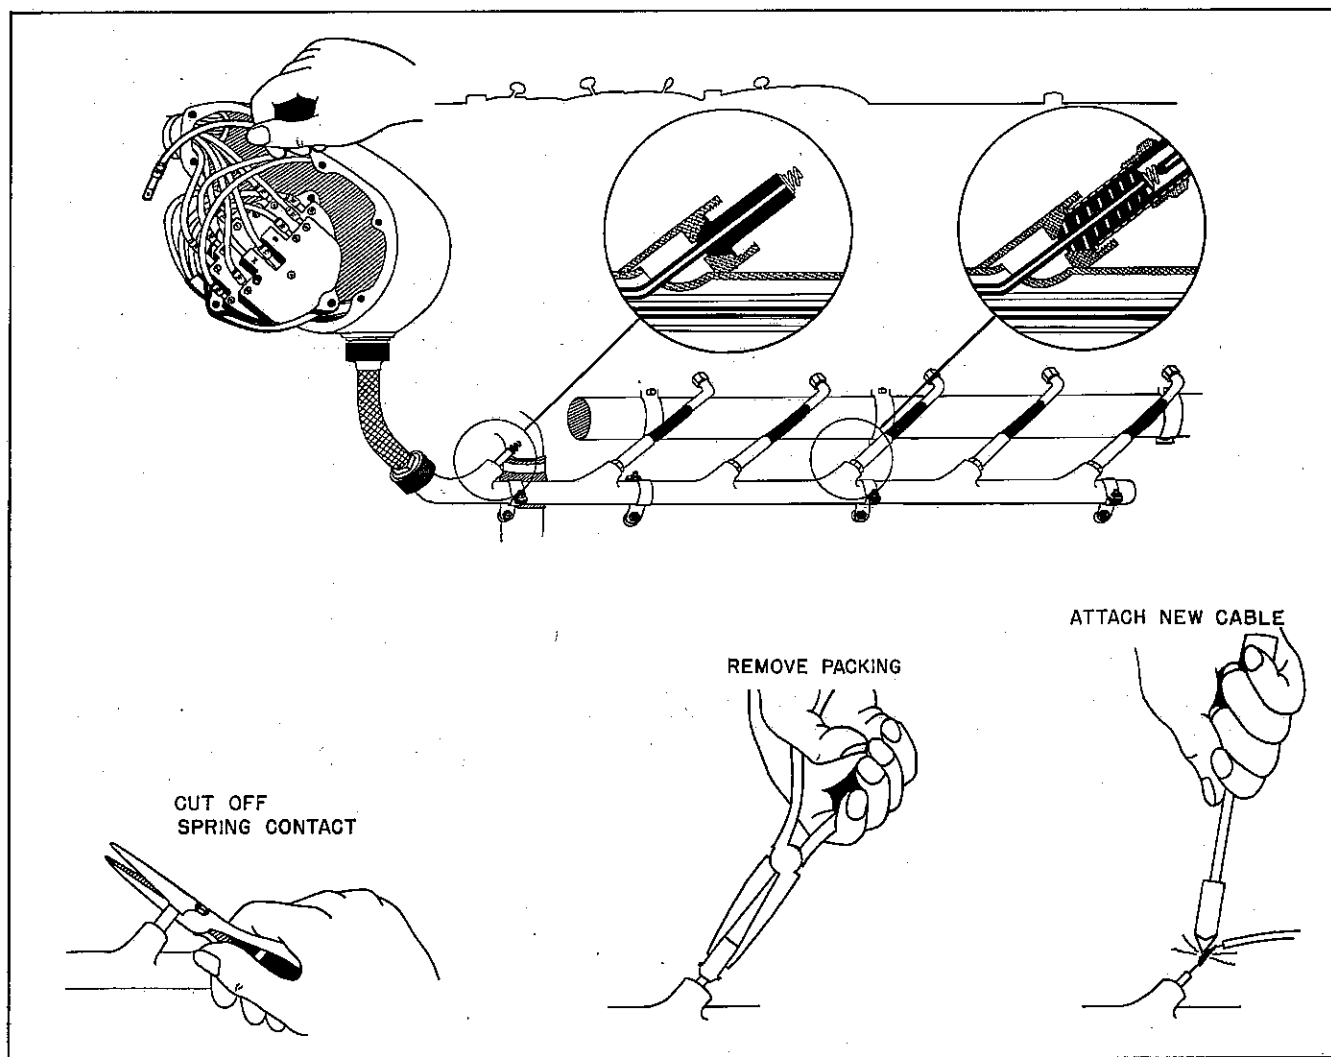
Removing Defective Exhaust Ignition Tube Cable.
